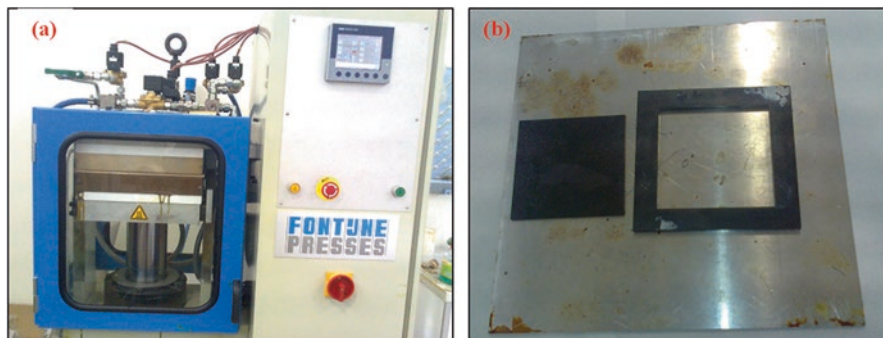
(a) Hot press machine present in laboratory and (b) the mold used for manufacturing of semi-cured composite prototypes
